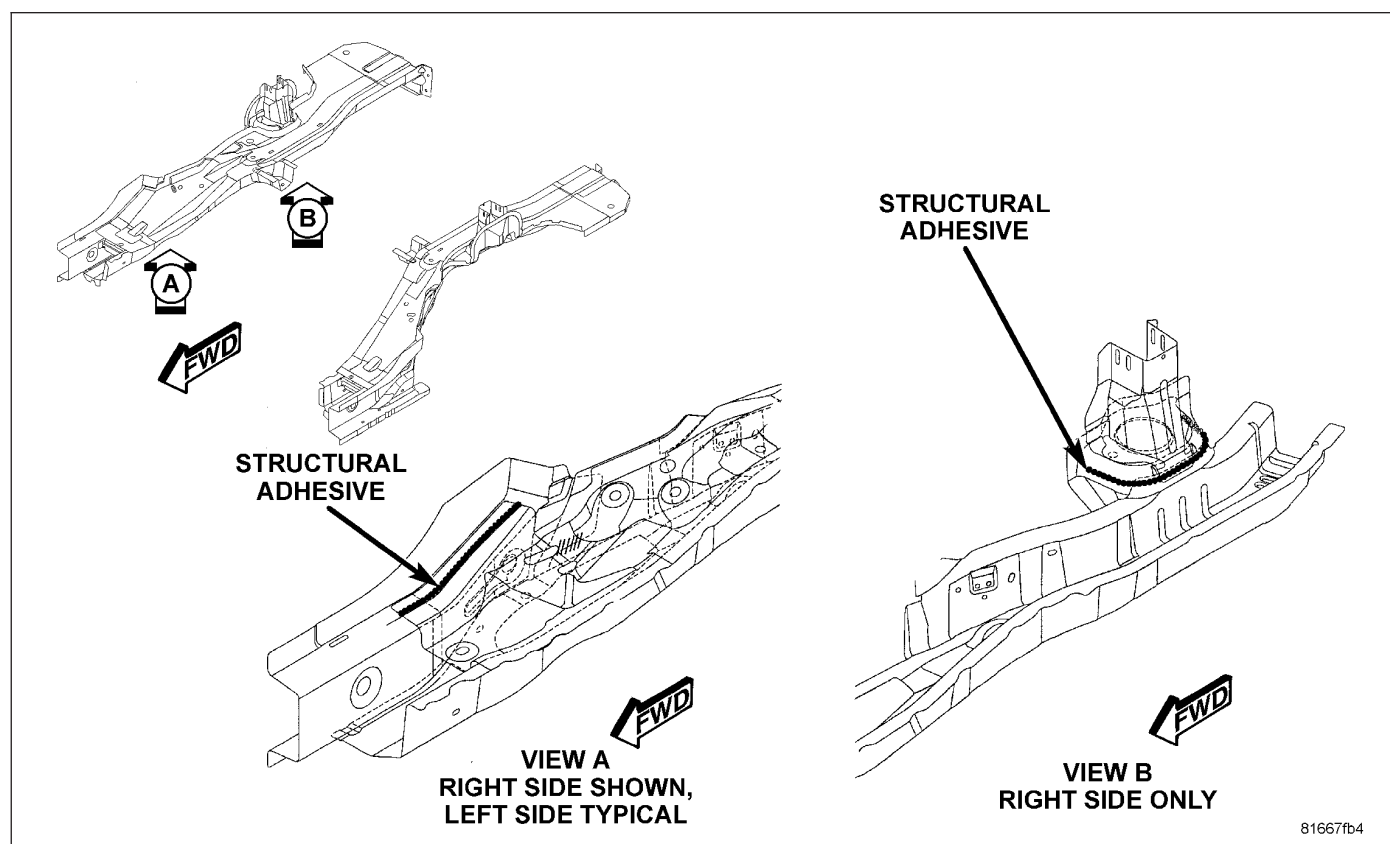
SIDEMEMBER ASSEMBLY (1 OF 2)
